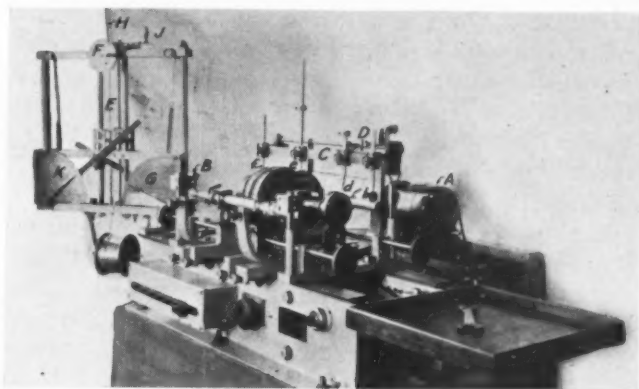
General view of machine. Measured solder is shown at H , ready for cutting off
